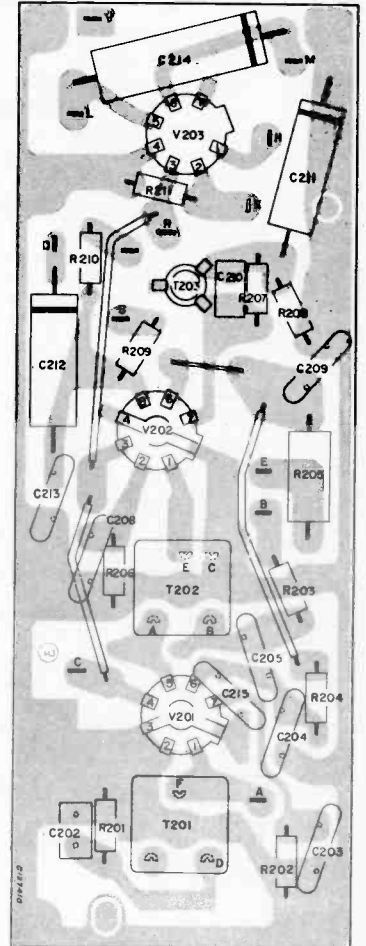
PW 200 Sound I-F & Audio Assembly Layout
